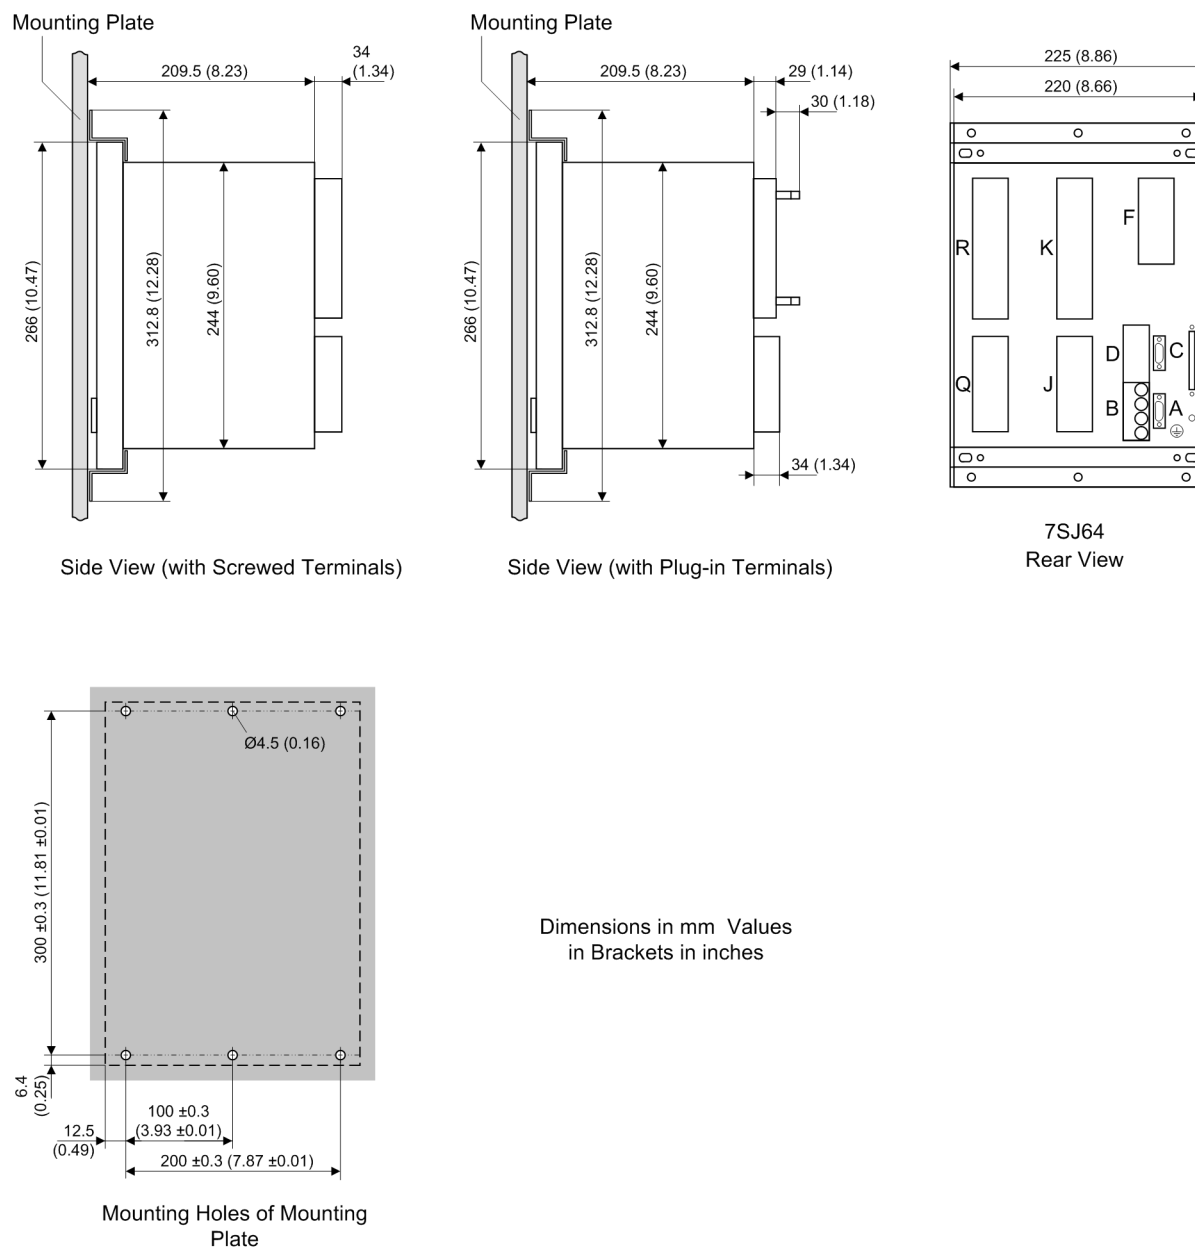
Dimensions 7SJ64 for mounting with detached operator panel or without operator panel (housing size $\frac{1}{2}$)
